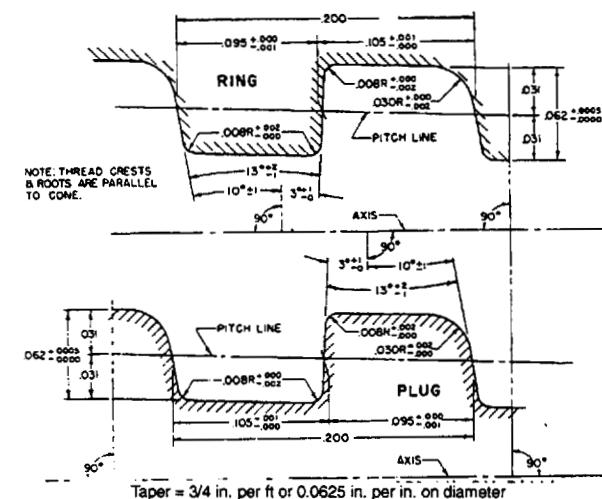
Gauge Thread Form and Dimensions for Buttress Casing
